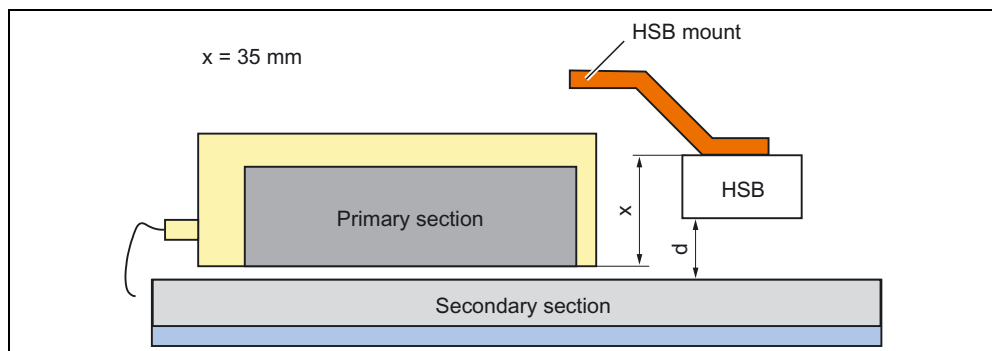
Nominal dimensions for mounting the Hall sensor box (HSB)
